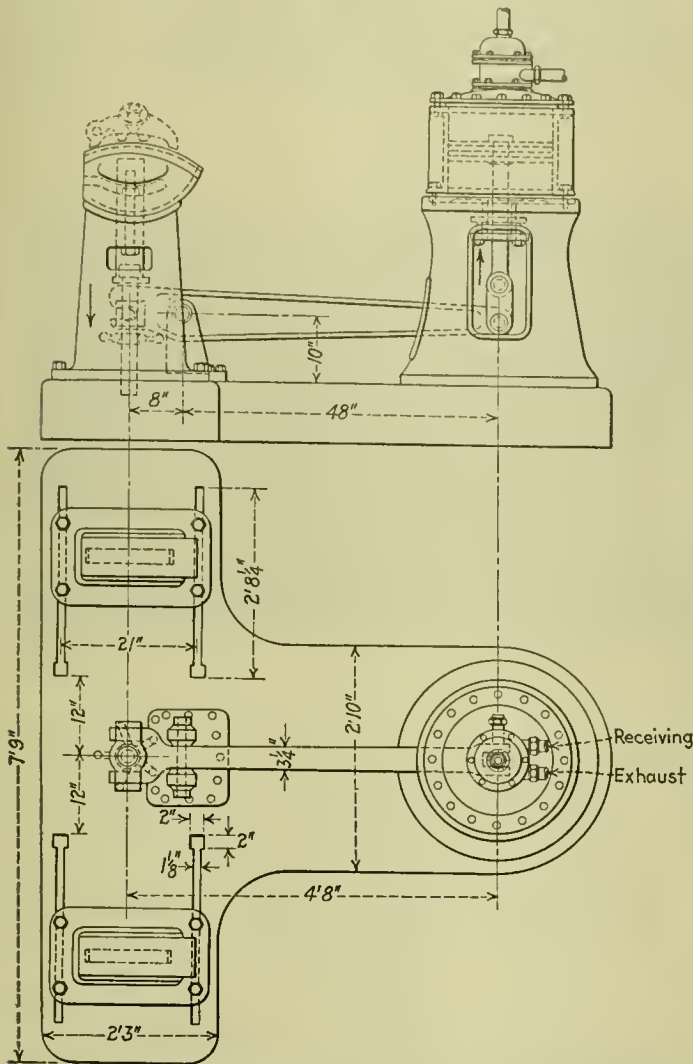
Brake Beam Testing Machine, 75,000 lb. Capacity
